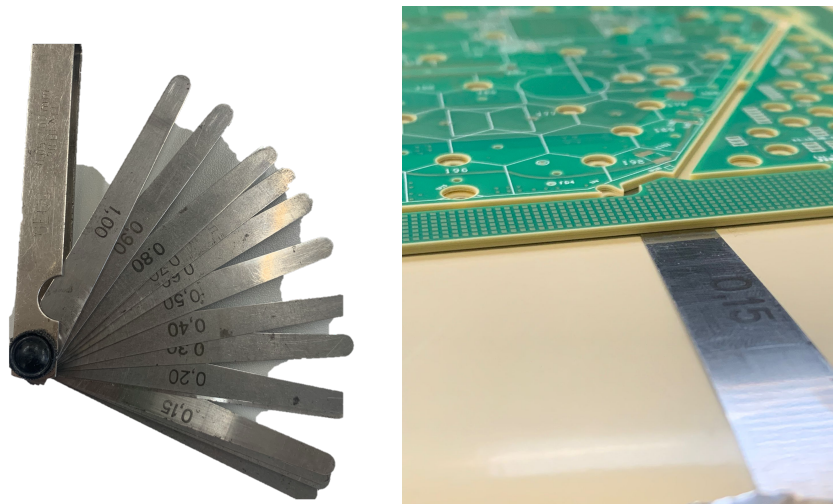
A practical demonstration of the board with the Feeler Gauge, which measures the flatness of the board.
